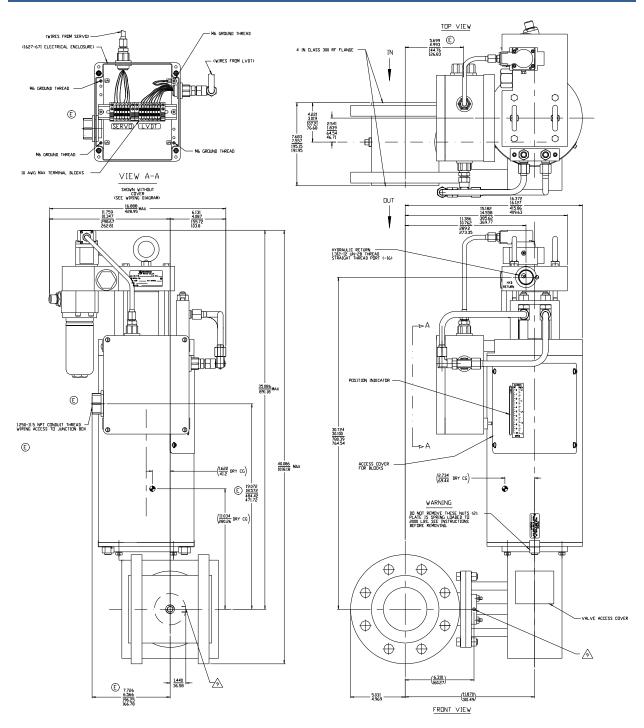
Gas Stop/Ratio Valve Outline Drawing (4-inch)
